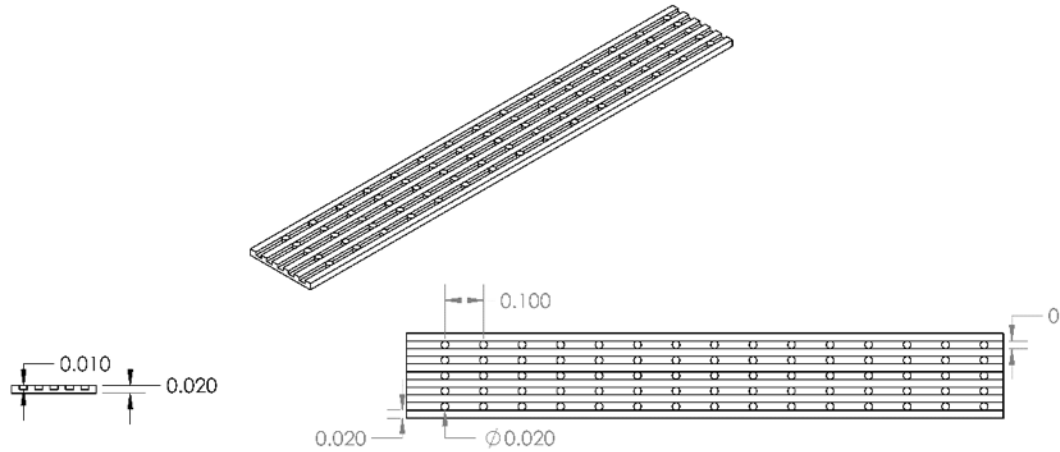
Cantilever drawing with dimensions (units: millimeters). Drawing created with SolidWorks (Dassault Systèmes)
